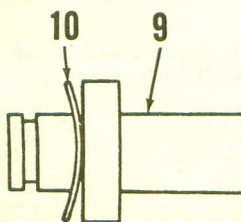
Install spacer (10) on piston (9) with concave side towards end of piston.
